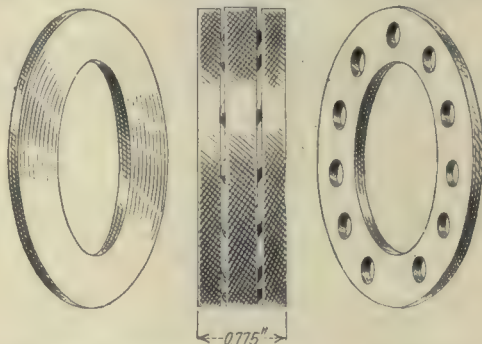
TWO THRUST PLATES AND A BALL CAGE
